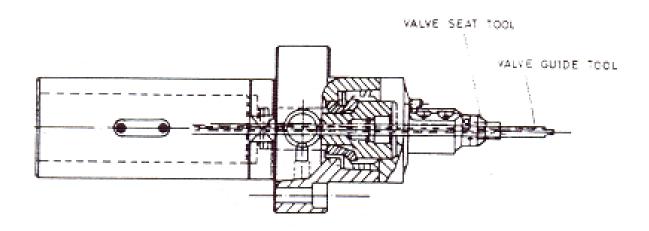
Tooling to Finish Machine Valve Seat & Valve Guide by Reaming Out.
